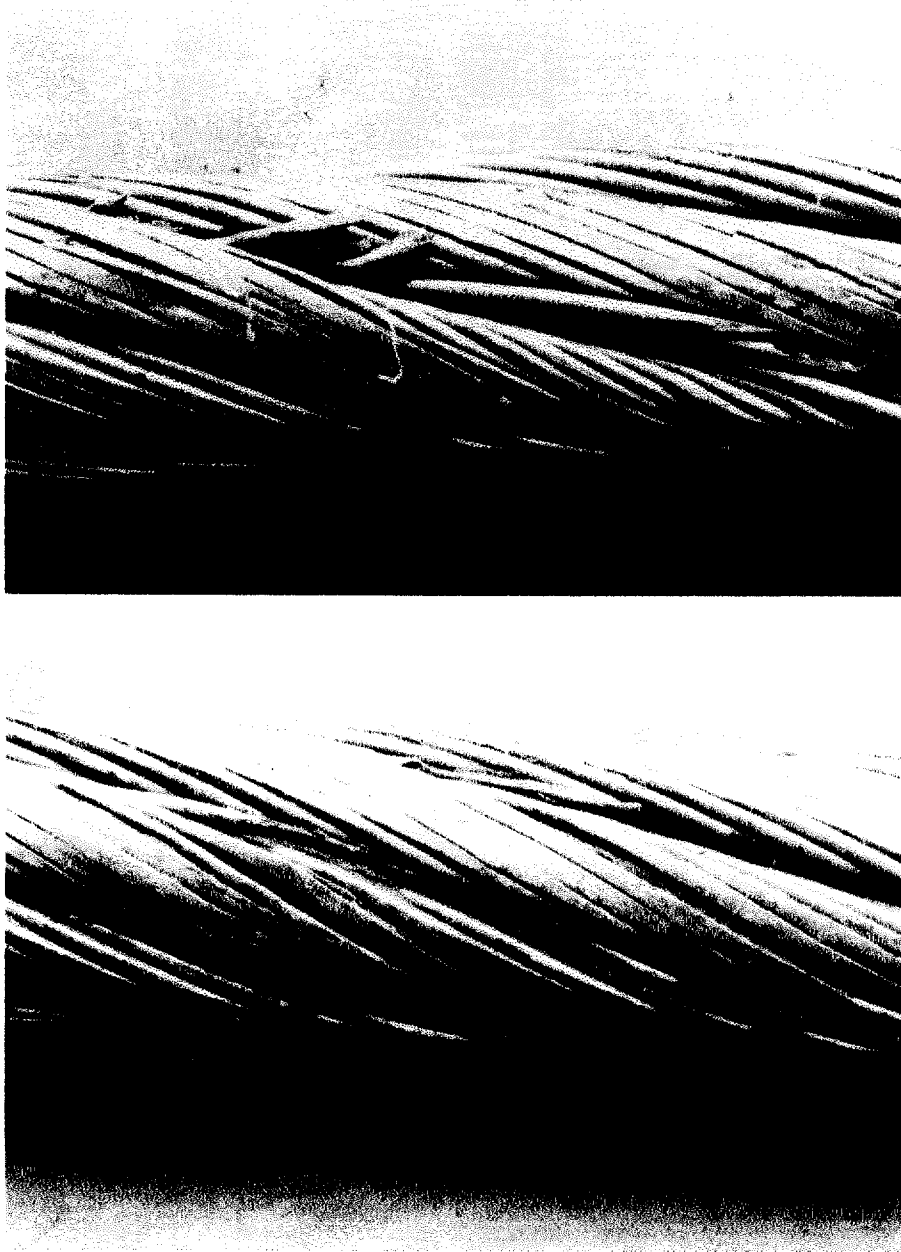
The photographs show the outside of the rope at the deteriorated section of the rope specimen. The broken and split wires are visible.
